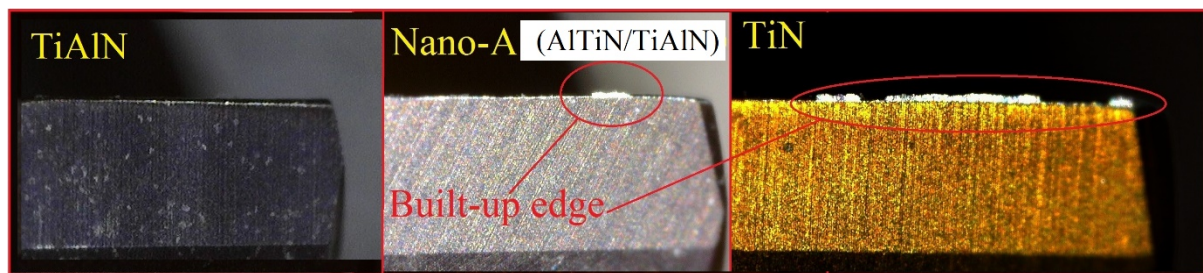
Microscopic images of cutting tool edges showing BUE in all three types of tools
